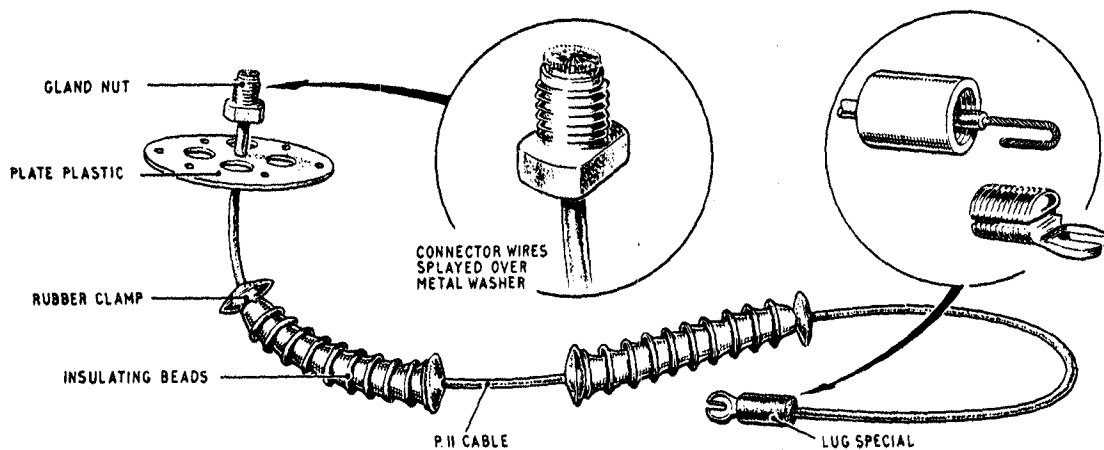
MAKING THE VEHICLE ANTENNA CONNECTOR
